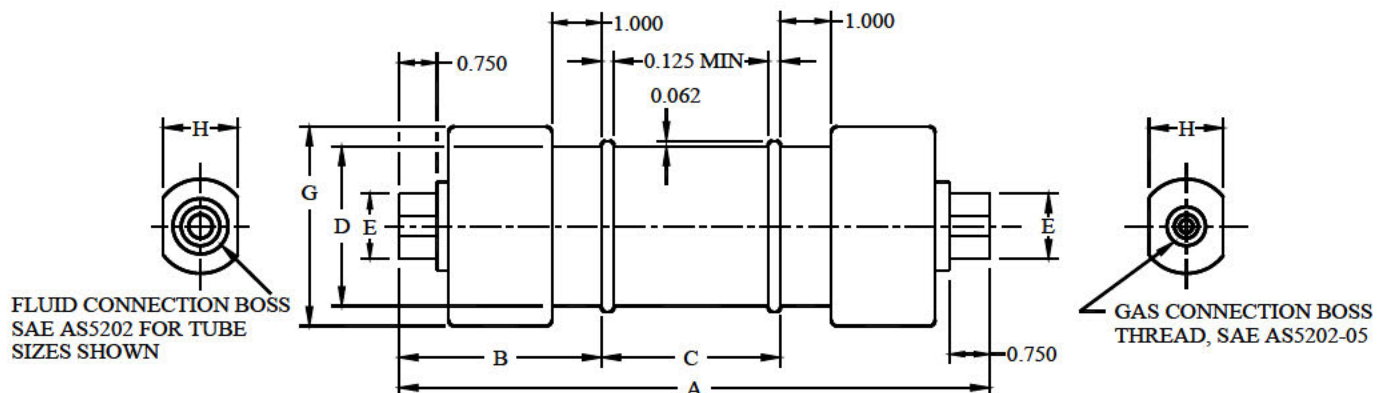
3,000 psi cylindrical hydraulic accumulator.
